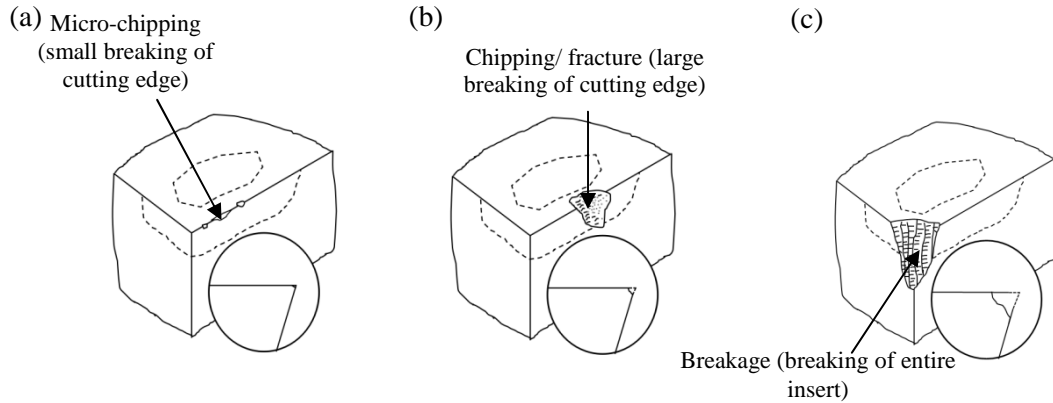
Tool failure by chipping and breakage (Grzesik, 2008a)
